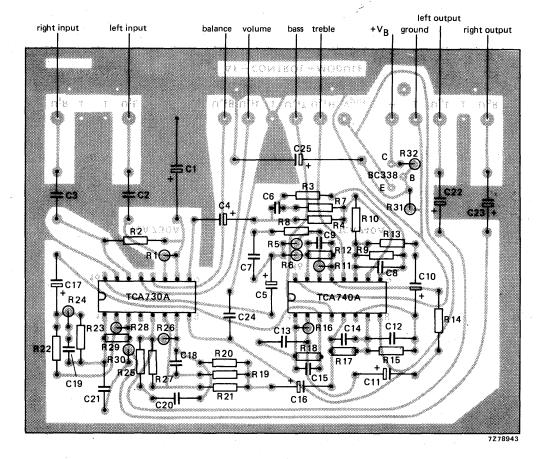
Printed-circuit board component side, showing component layout; for circuit diagram see Fig. 7.
